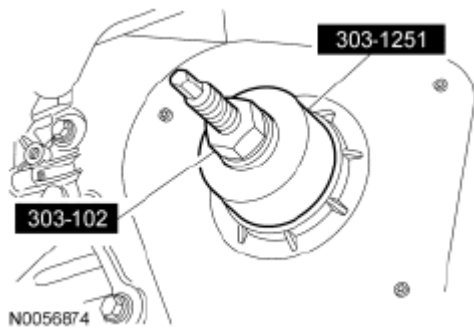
Identifying Crankshaft Vibration Damper Installer And Front Crankshaft Installer
